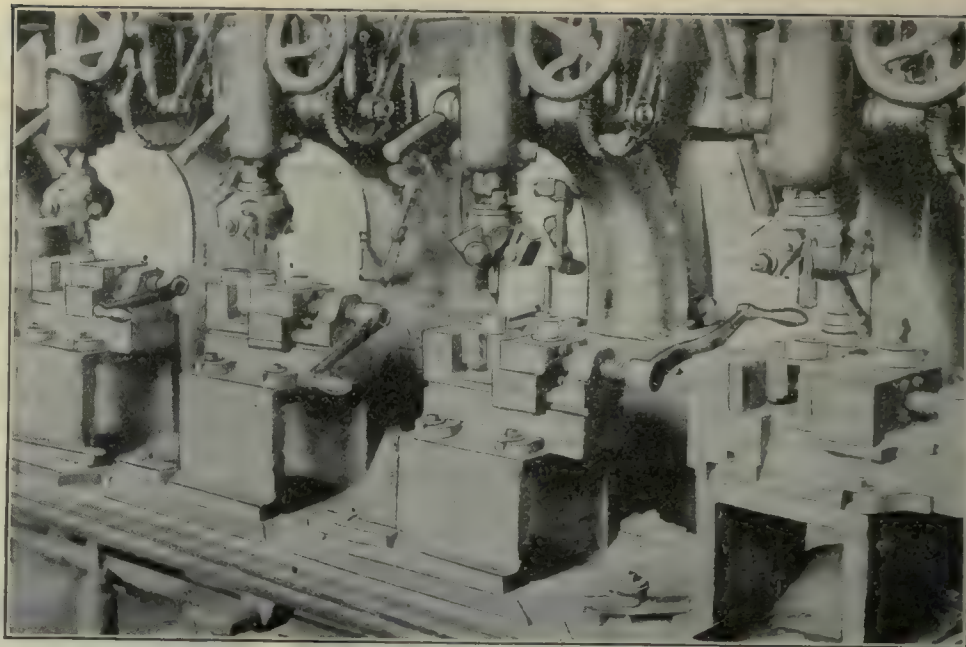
FINISHING INSIDE AND OUTSIDE OF GUIDE BUSHINGS
